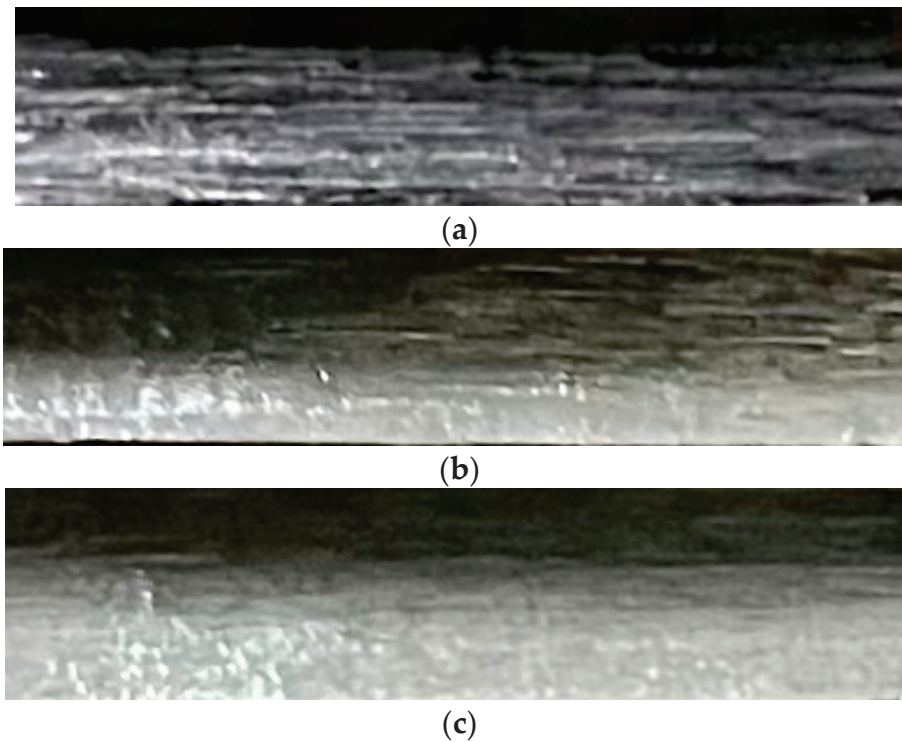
(a) The state of the tooth surface for single hobbing with the axial feed of 1 mm/r. (b) The state of the tooth surface for single hobbing with the axial feed of 0.5 mm/r. (c) The state of the tooth surface for double hobbing with the axial feed of 0.5 mm/r.
